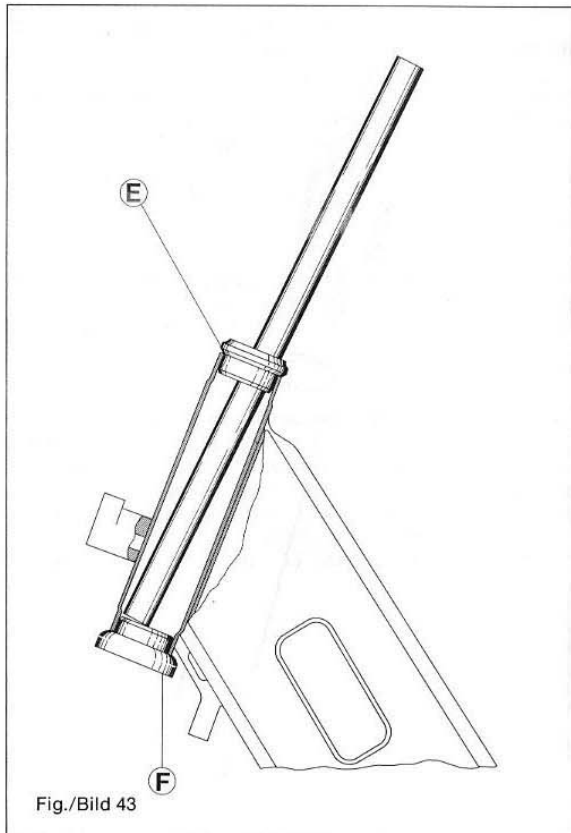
Lower and upper tracks of the steering bearings: introduce from the upper side of head tube one punch of outer \varnothing 20 mm. 400 mm. long, and expel, by means of mallet blows, the upper track "F" of the steering lower bearing. Analogously act from the lower side of headtube in order to extract lower track "E" of the upper bearing.
